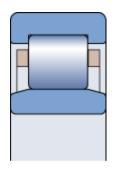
3: SKF NU 2215, single row cylindrical roller bearing [11]
